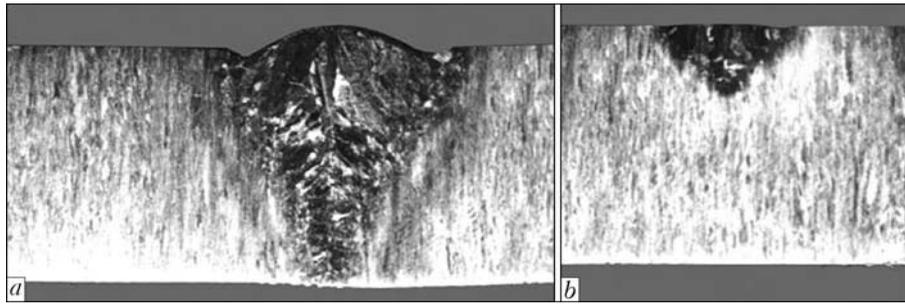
Macrostructures of welds on titanium alloy VT6 ( $\delta = 13$  mm): *a* – laser-arc welding; *b* – laser welding
